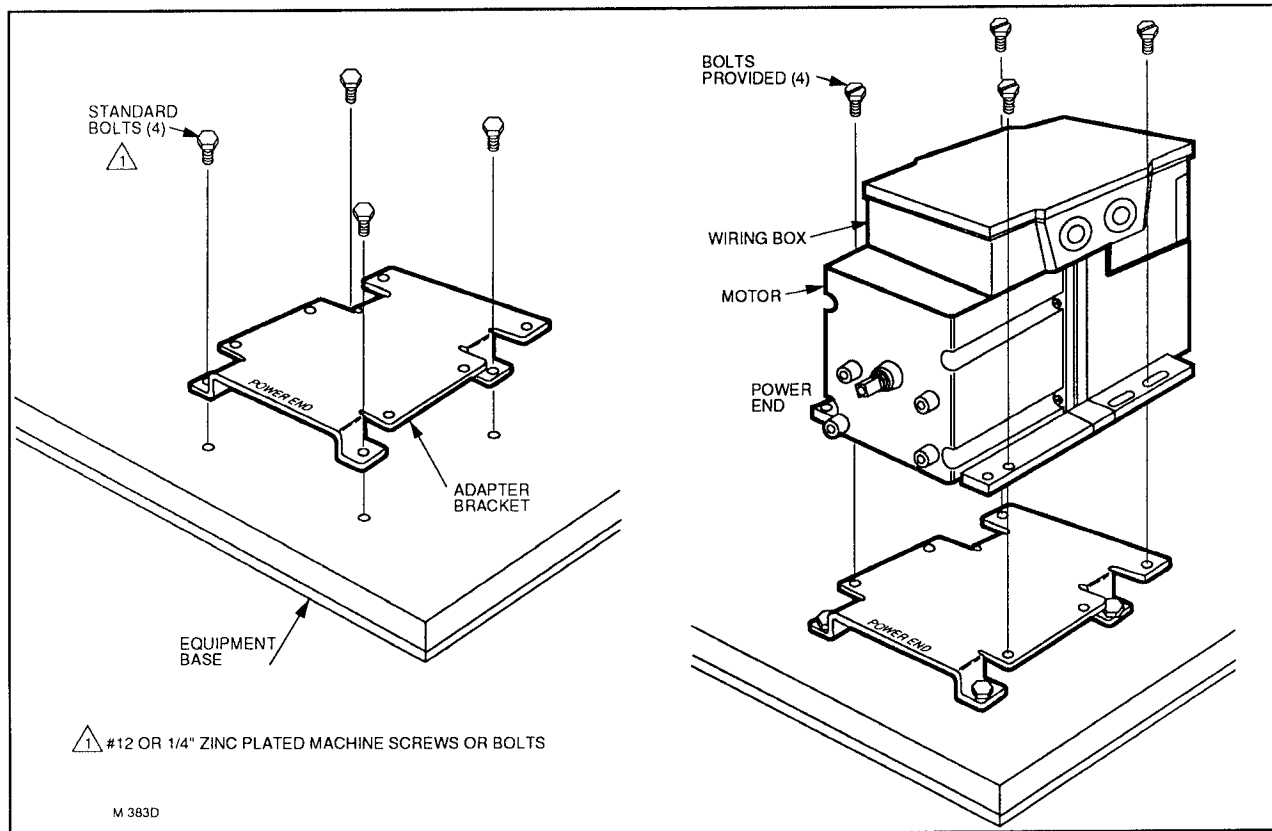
MOUNTING MOTOR WITH ADAPTER.
